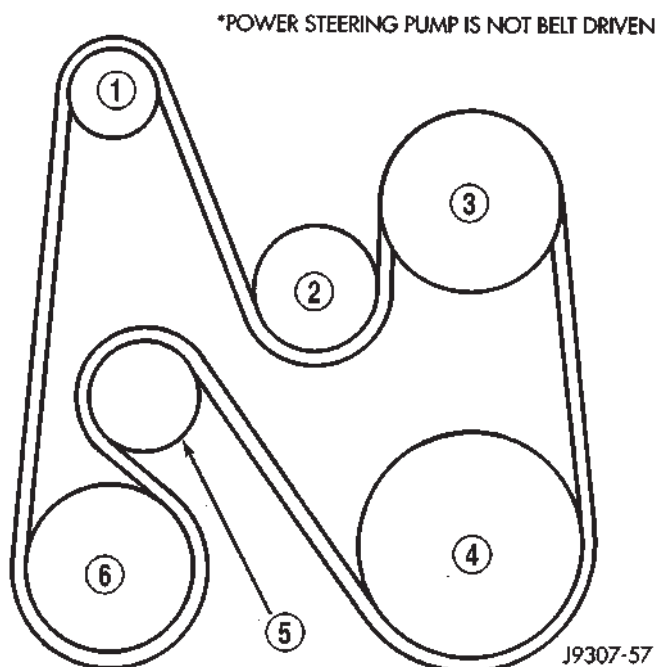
Belt Routing—5.9L Diesel Engine—With A/C
